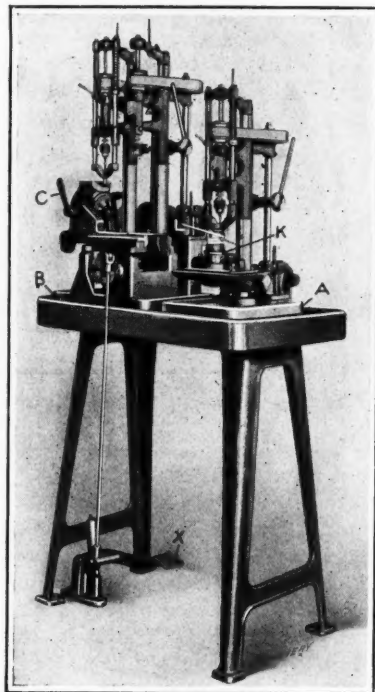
Gang and Single-spindle Drilling Machines for drilling Fuse Body, showing Work in Position
